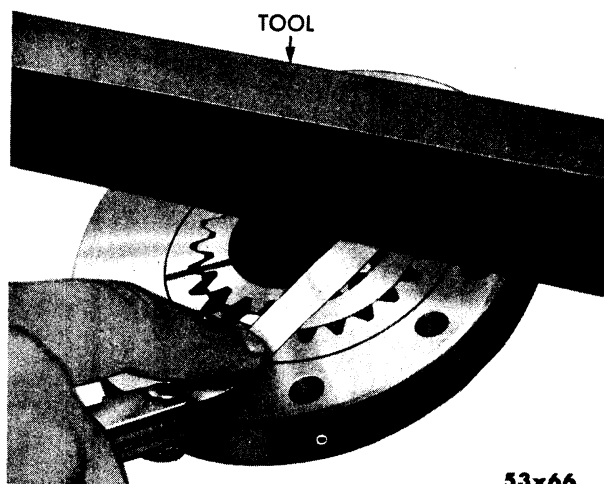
Checking Clearance Between Rear Pump Body and Gears
